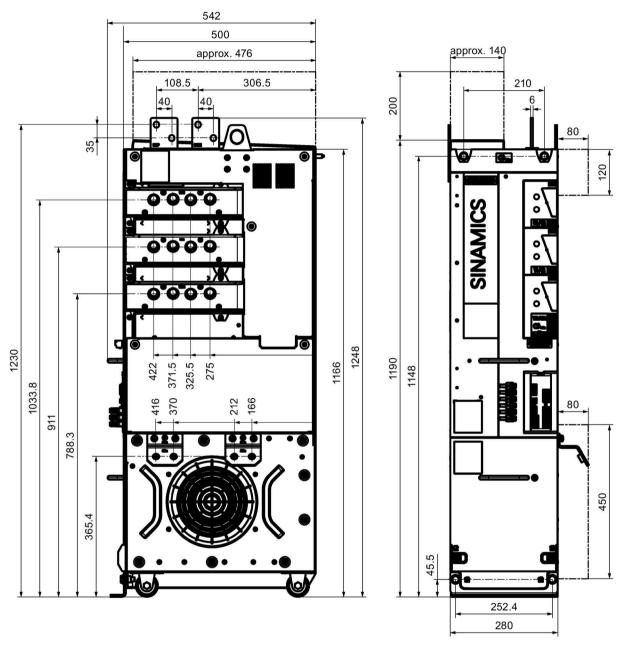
Dimension drawing, Active Line Module Chassis-2, frame size FS2+. Side view, front view
